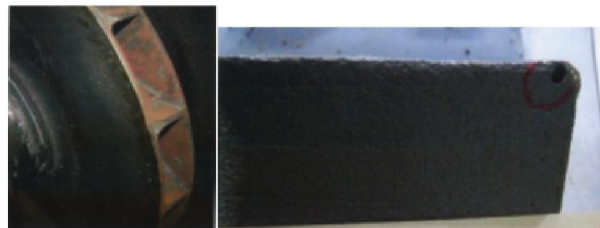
Impeller Corrosion and Return Bend Pitting
